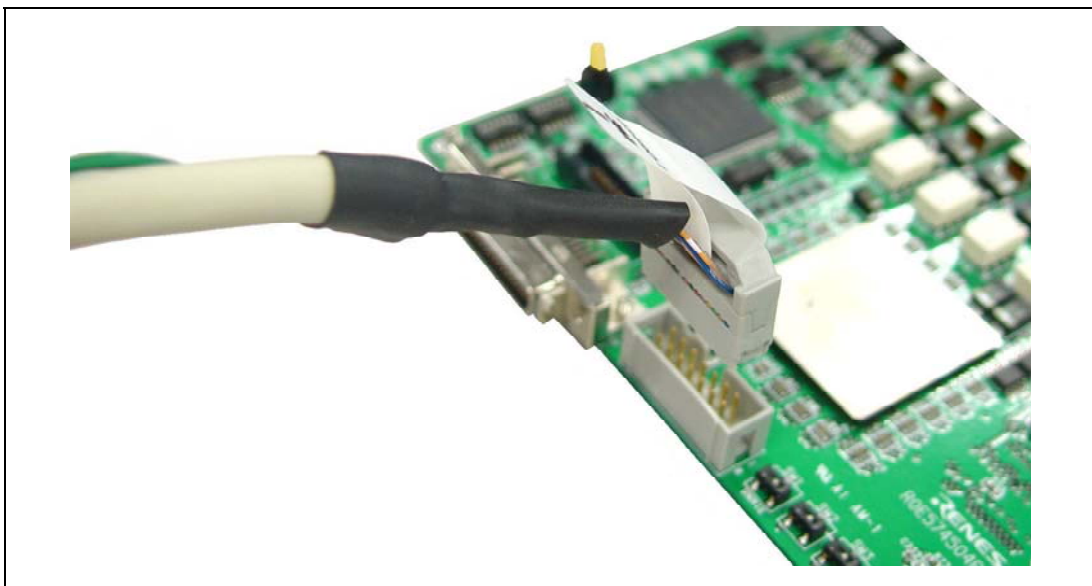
Connecting the User System Interface Cable (14 Pins) to the Debugging MCU Board
